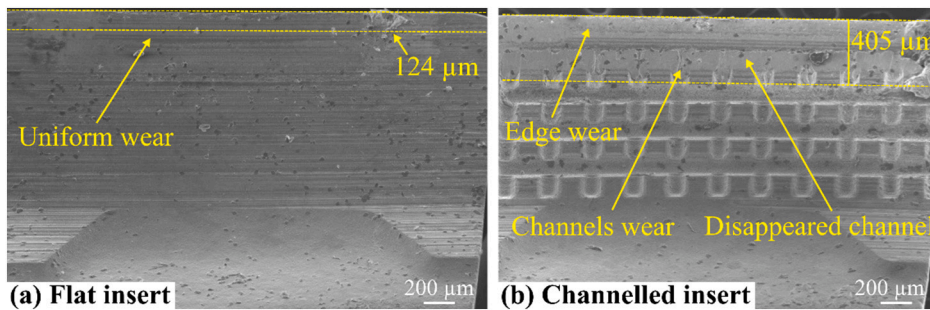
SEM inspection of the inserts' rake faces following machining under coolant conditions. (a) Flat insert, depicting a minimum amount of wear that is constrained to about 124 μm from the cutting edge. (b) Channelled insert showing a larger depth of wear (405 μm) due to the reduced stiffness and the increased friction in the contact zone with the microchannels.
